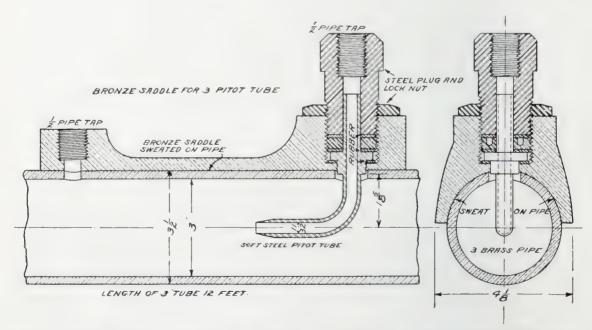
SECTIONAL VIEW OF THE OLIPHANT PITOT TUBE, SHOWING SADDLE, TIP AND SECTION OF BRASS TUBE
